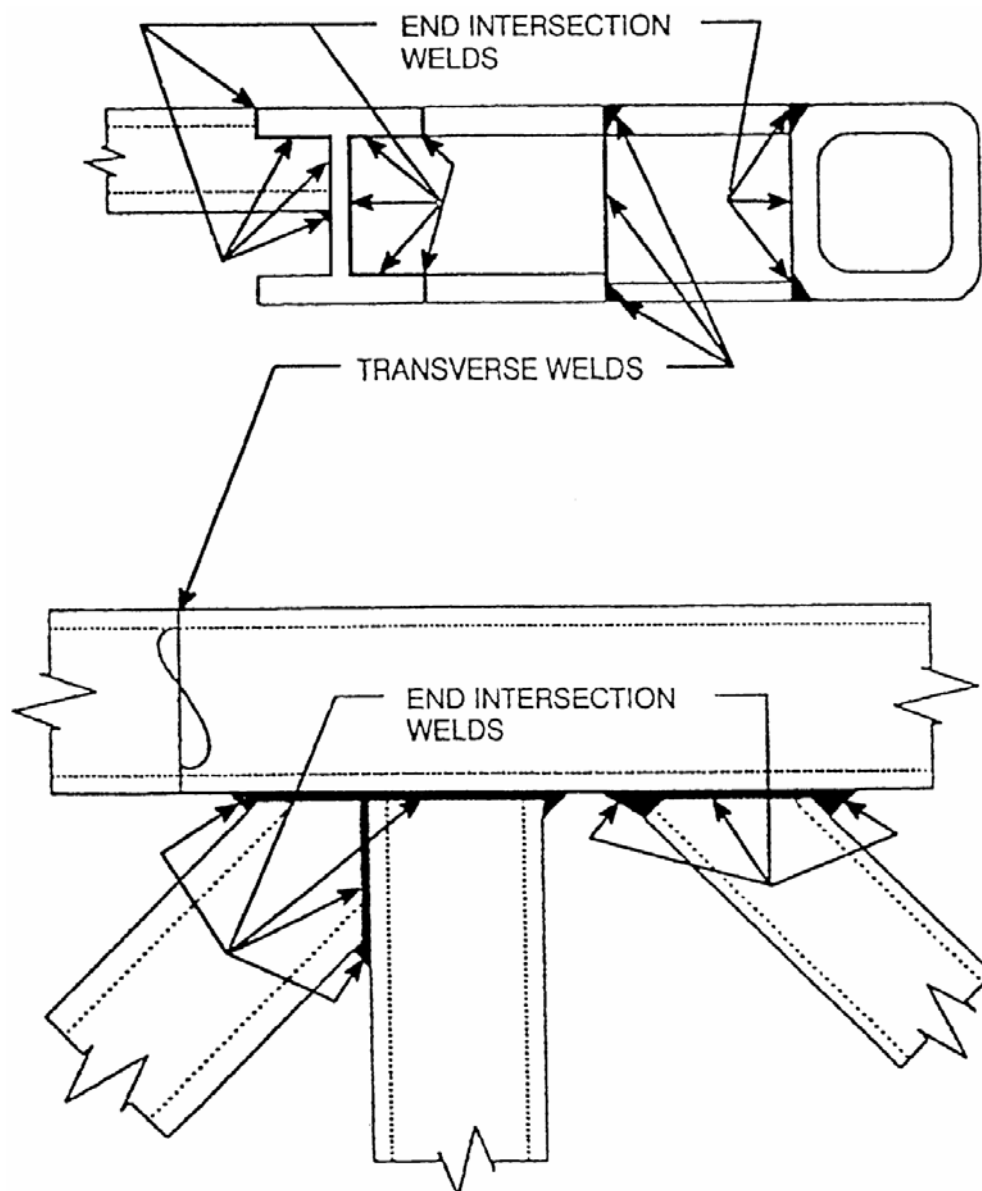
EXAMPLES OF END INTERSECTION WELDS OF, OR TRANSVERSE WELDS IN, BEAM-TYPE OR BUILT-UP MEMBERS.
